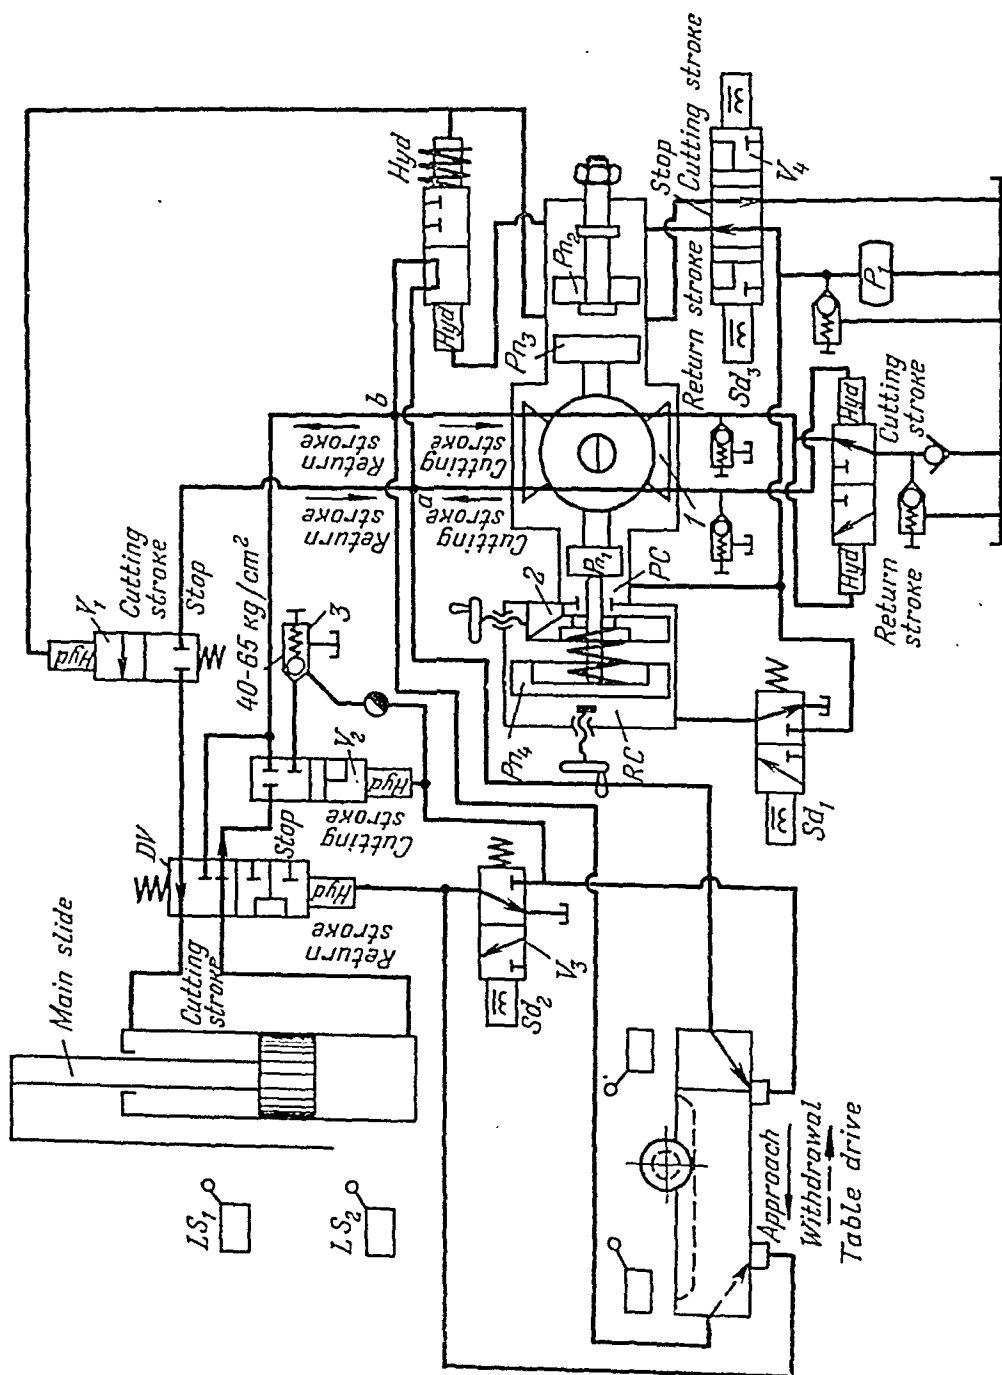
Hydraulic circuit of a vertical surface broaching machine
